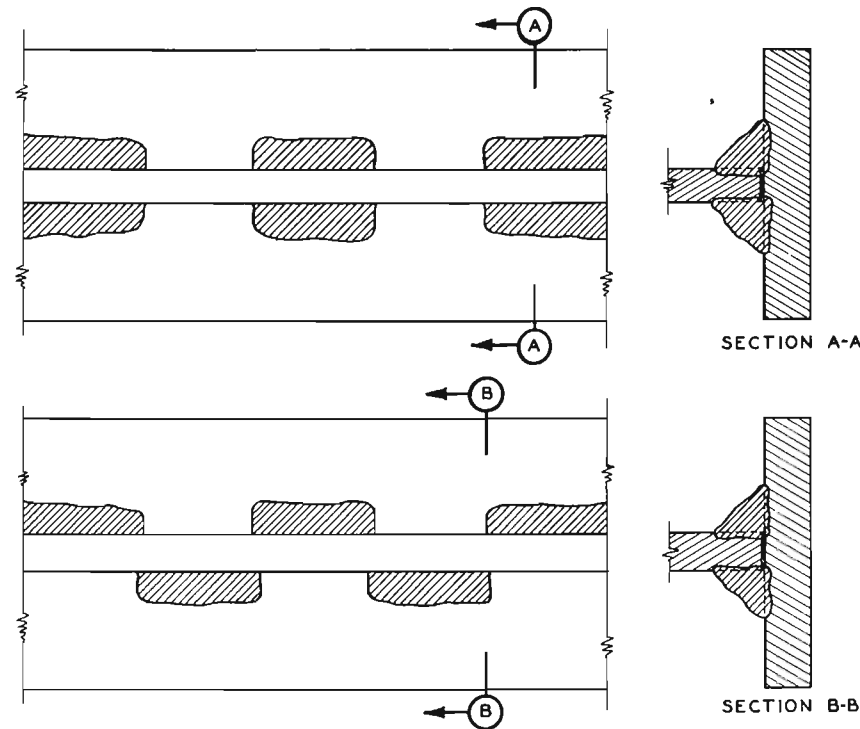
Fillet welds spaced intermittently to counteract distortion.
